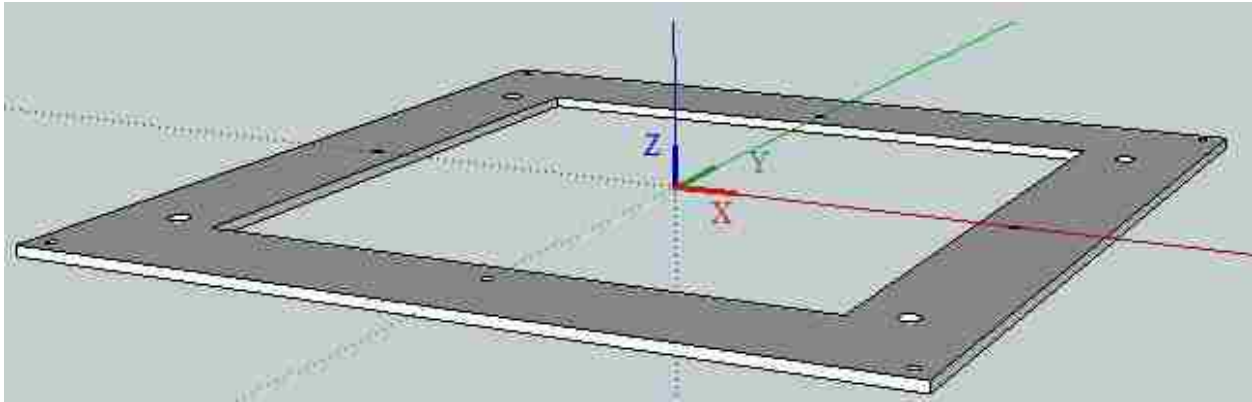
Orthogonal view of the 20x20 cm² lower trimmer aluminum plate.
